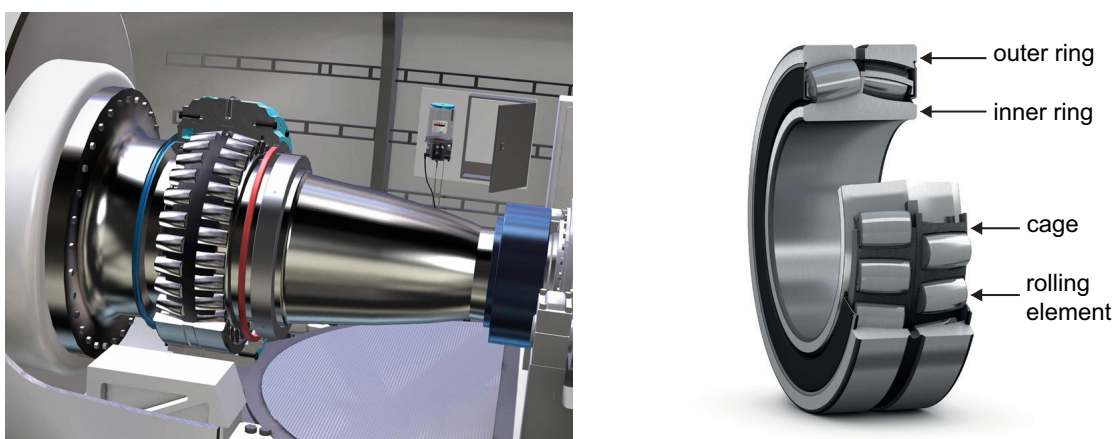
Spherical roller main bearing used in WTs. Courtesy of SKF.
